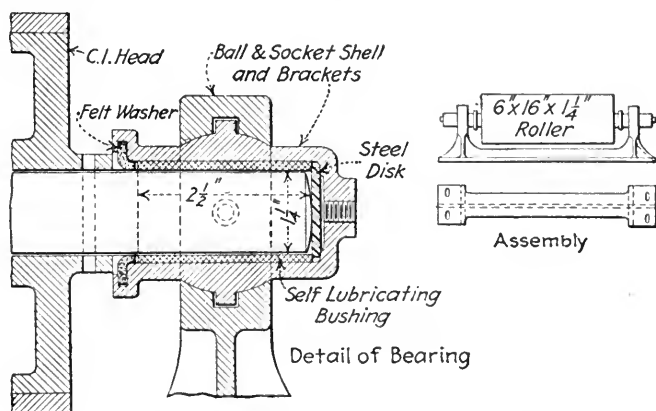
IMPROVED ROLLER AND ITS BEARING.
